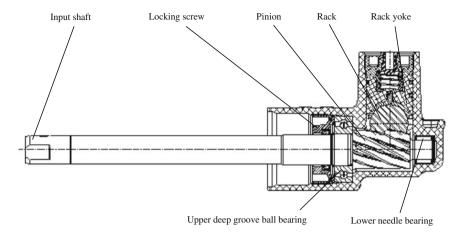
Pinion bearing arrangement with deep groove ball bearing (top) and needle bearing (bottom)
